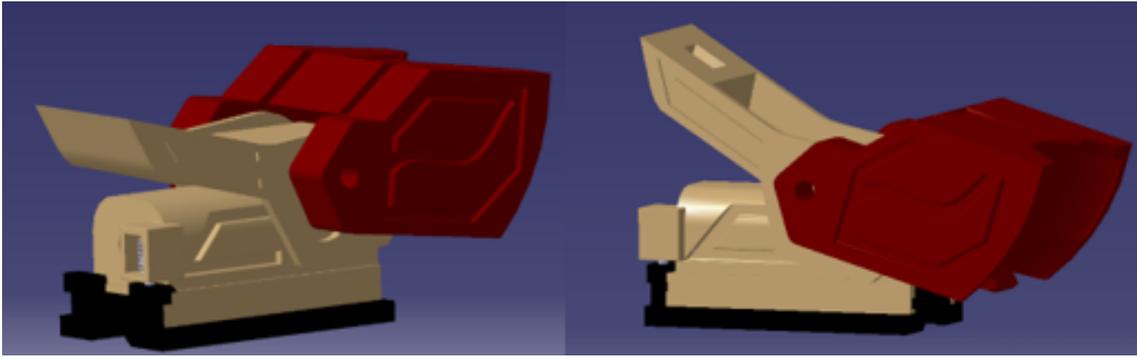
Final concept - positioning of heel piece to attach/detach ski boot
